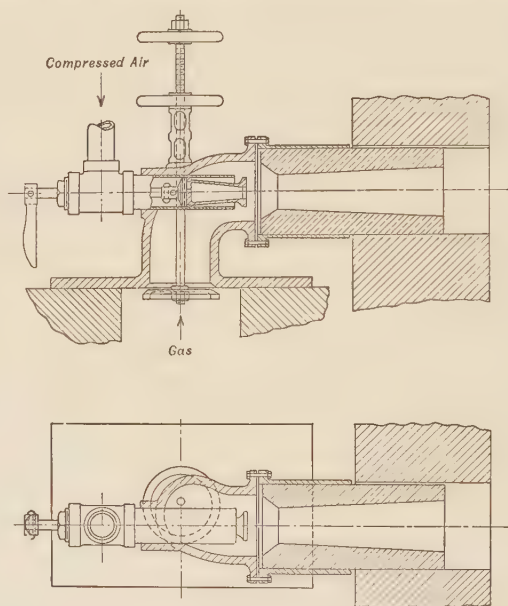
Burner for raw producer gas. Note the two handwheels for freeing gas valve when stuck with tar.
